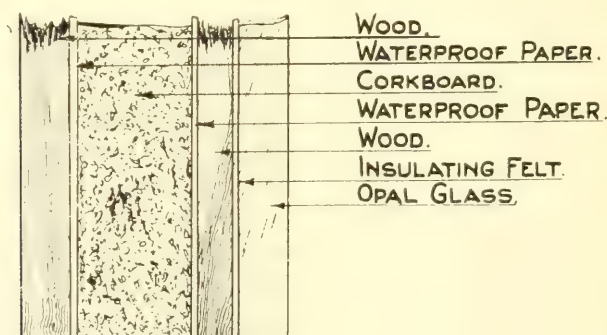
TYPICAL REFRIGERATOR WALL CONSTRUCTION
